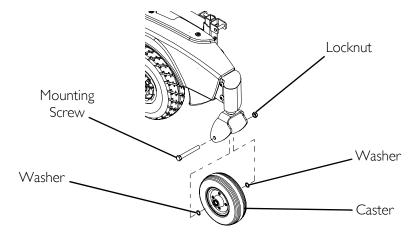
Replacing Front/Rear Caster Assemblies
